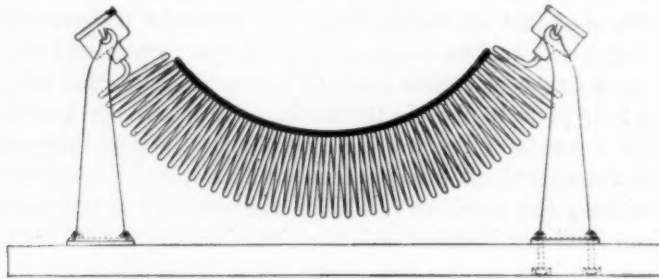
SPIRAL SPRING ROLLER FOR BELT
